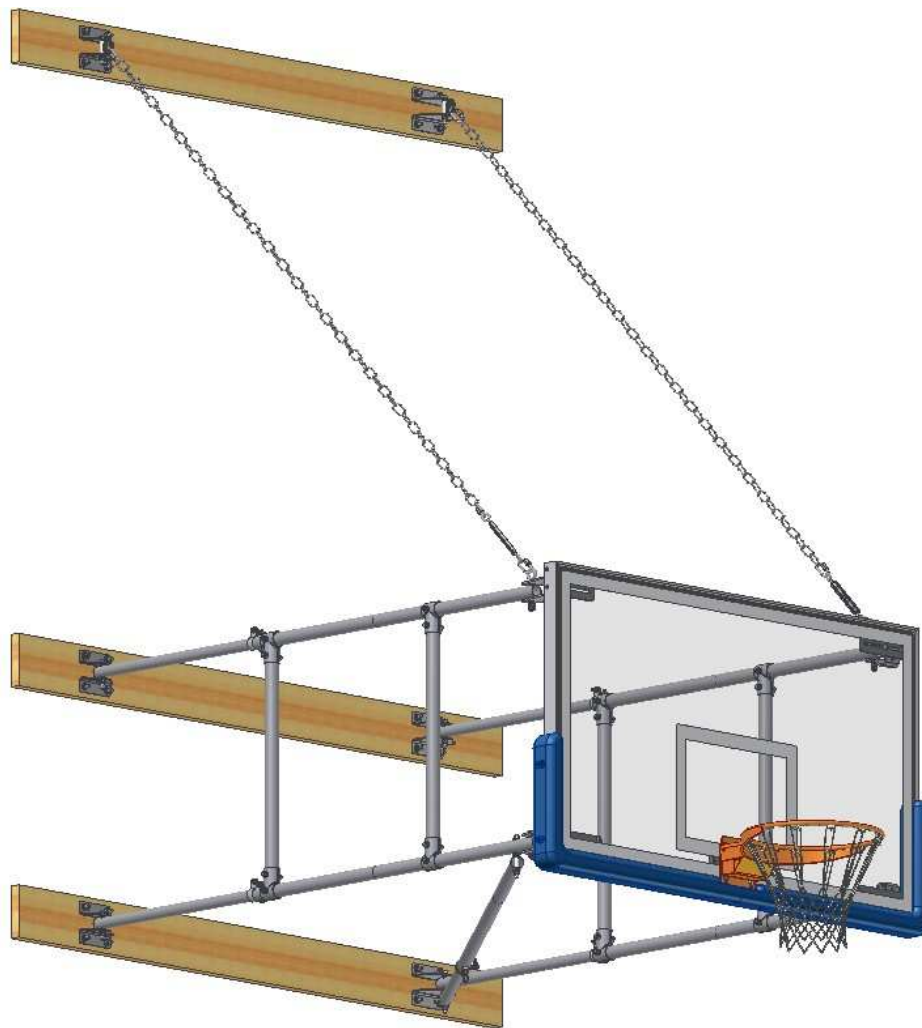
Jaypro Side-Fold Wall Mounted Backstop
